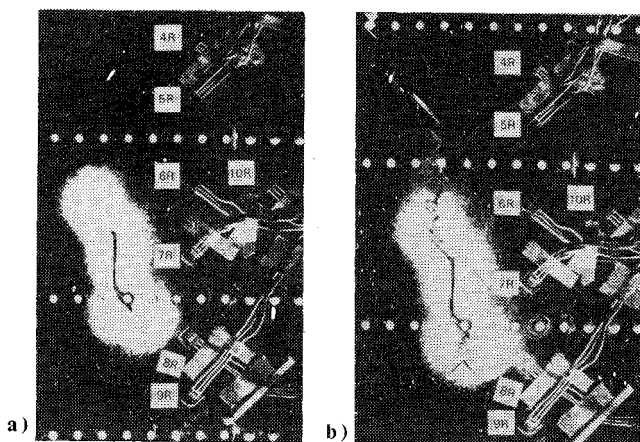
Initial failure of large-scale panel with buffer strips: a) before initial failure; b) after initial failure.
